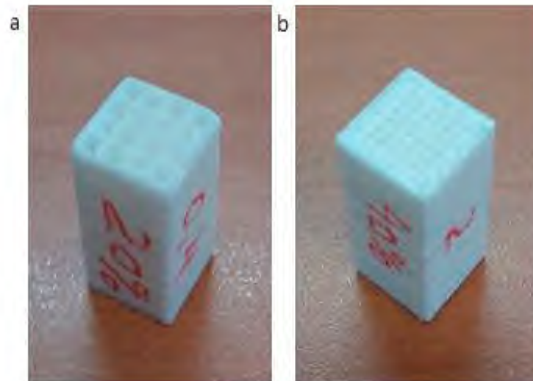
Part printed using a 0.4 mm nozzle, a) 20 % infill, and b) 40 % infill [28].
